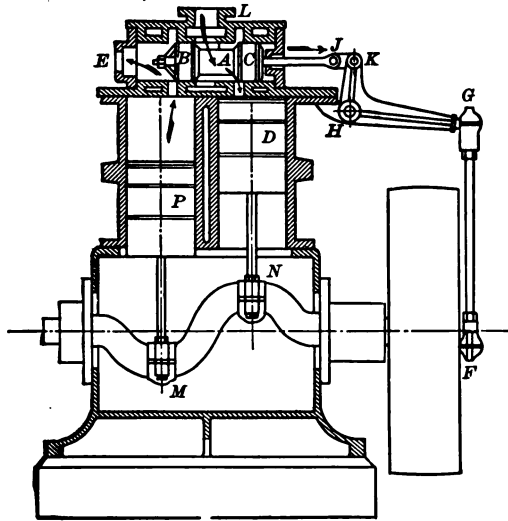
WESTINGHOUSE "JUNIOR" SINGLE-ACTING STEAM ENGINE
